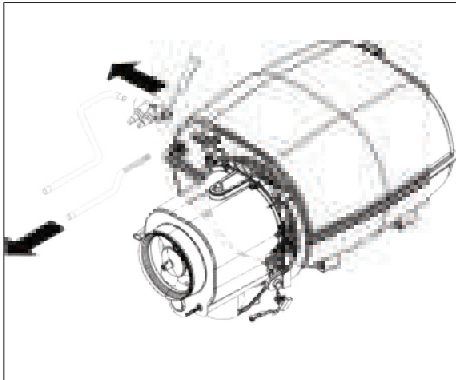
Remove hot and cold-water line connections and ventilation / overpressure valve
